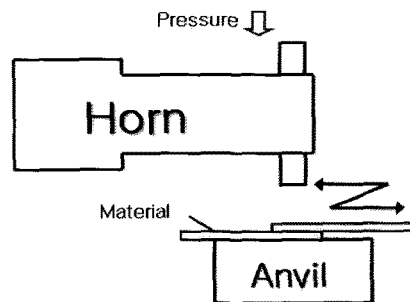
Basic principle of ultrasonic metal welding
